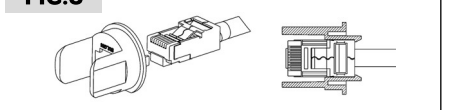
• Push the RJ45 into the carrier moulding until it latches.
